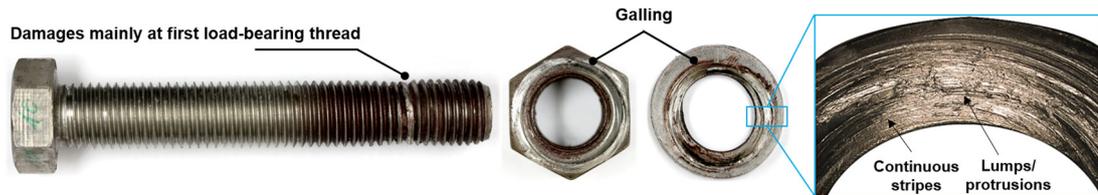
Galling of the nut bearing surface when tightened into plastic range: bolt (left), nut and washer (middle), and detailed view of washer (right)
